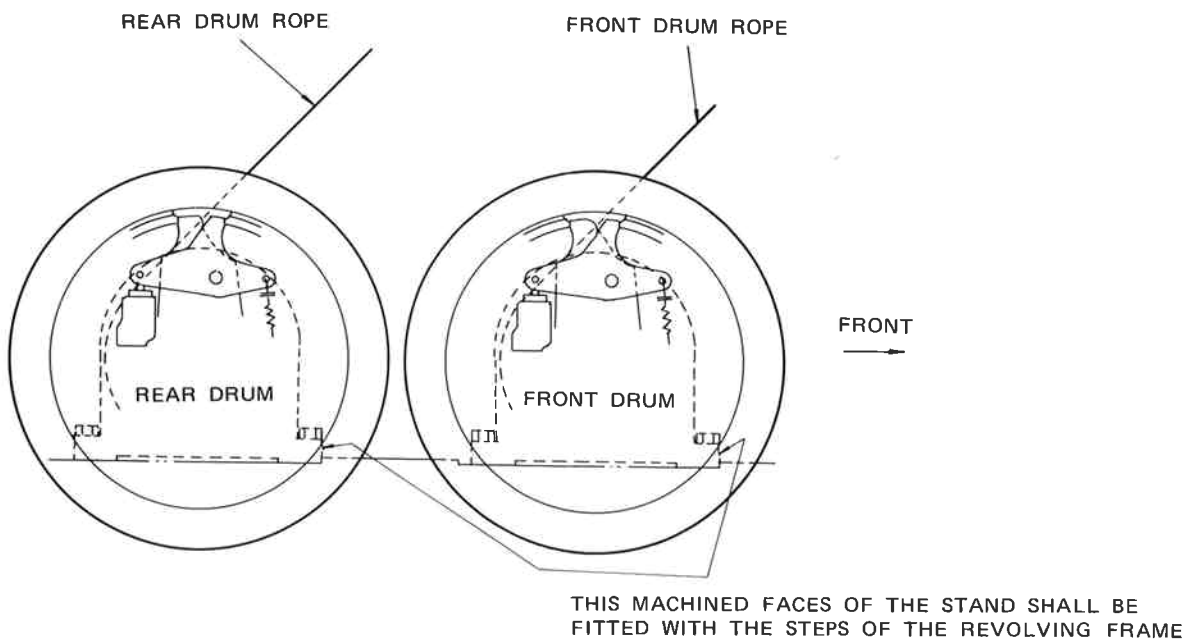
Installation of the Front and Rear Clutches and Drum Assemblies
